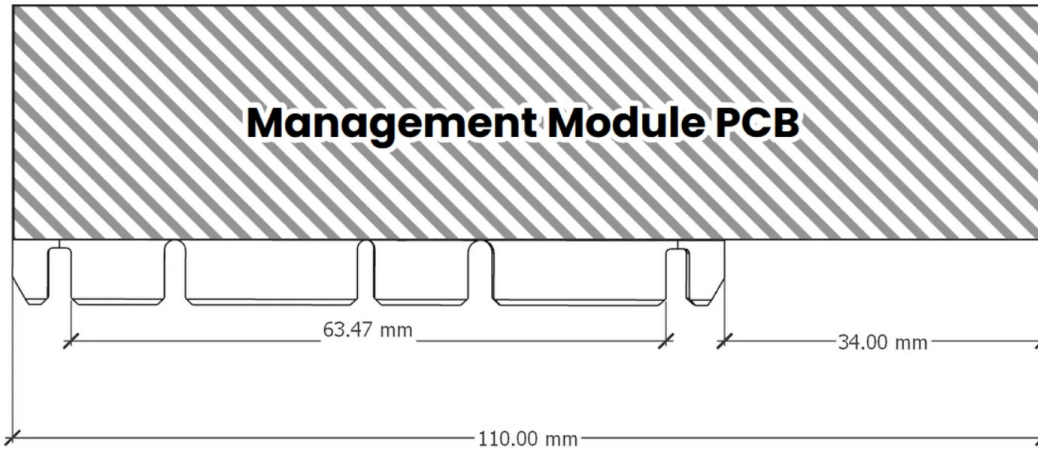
Management Connector Plug Layout (Top View)
